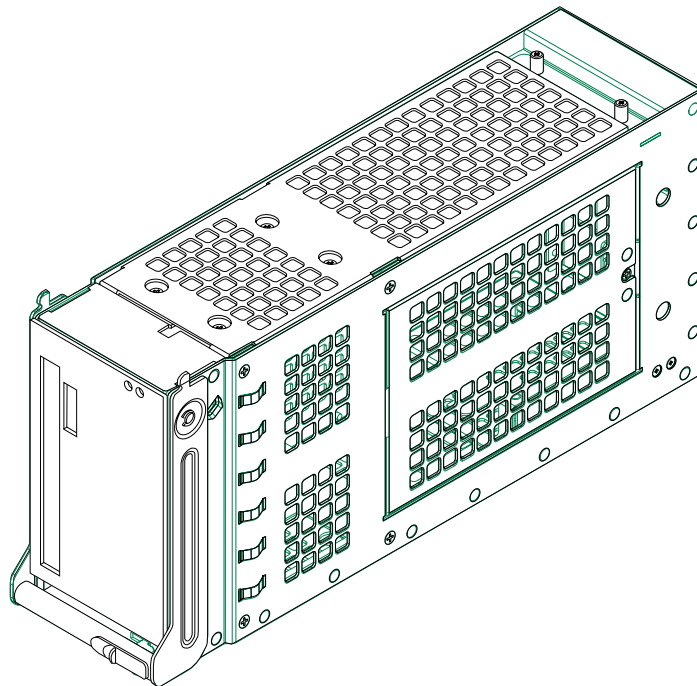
RMM Drive Chassis (CD-ROM-only Configuration)
